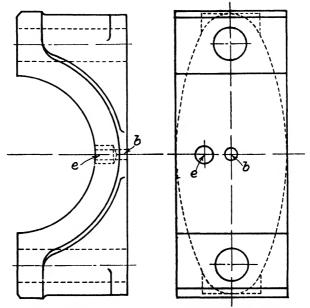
BEARING CUP FOR INTERMEDIATE BEARING OF A E C. ENGINE
